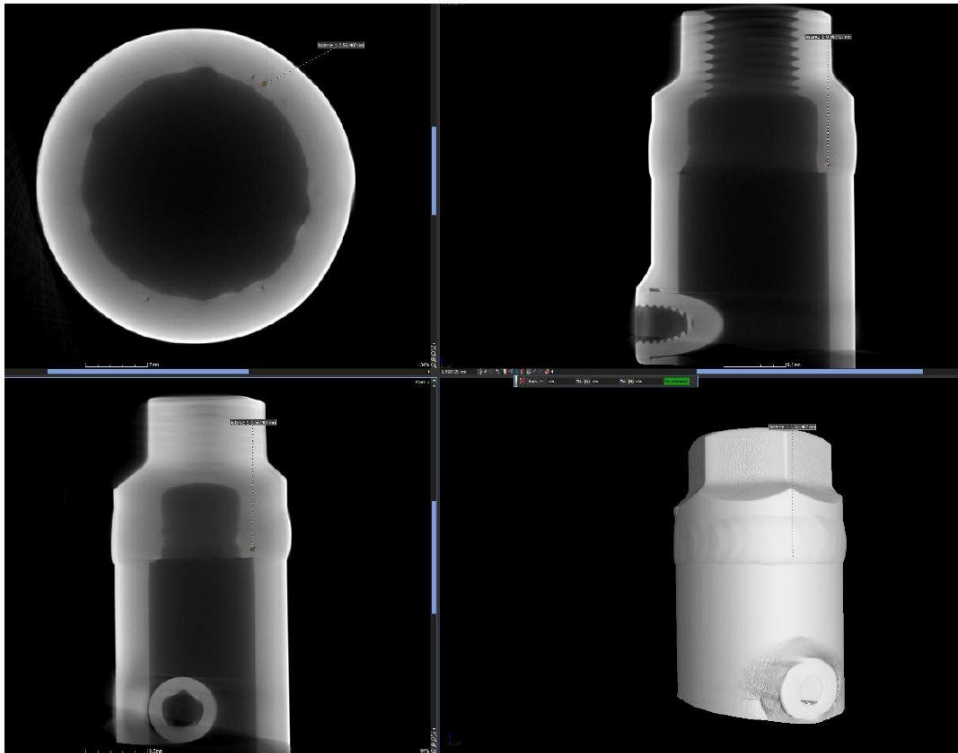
Tomography: Sample 1, Welding 2.
